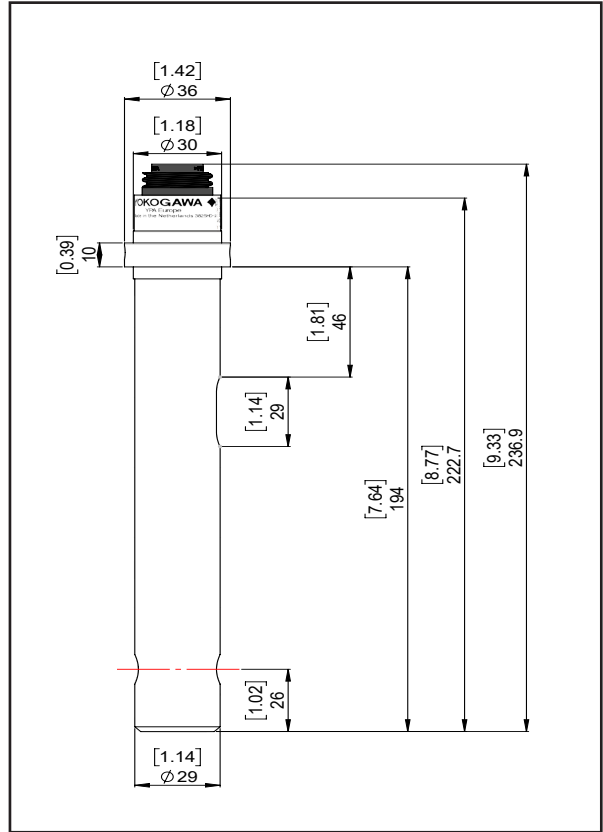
Dimensions of SC42 SV24 / SG24 (in mm [inches])
